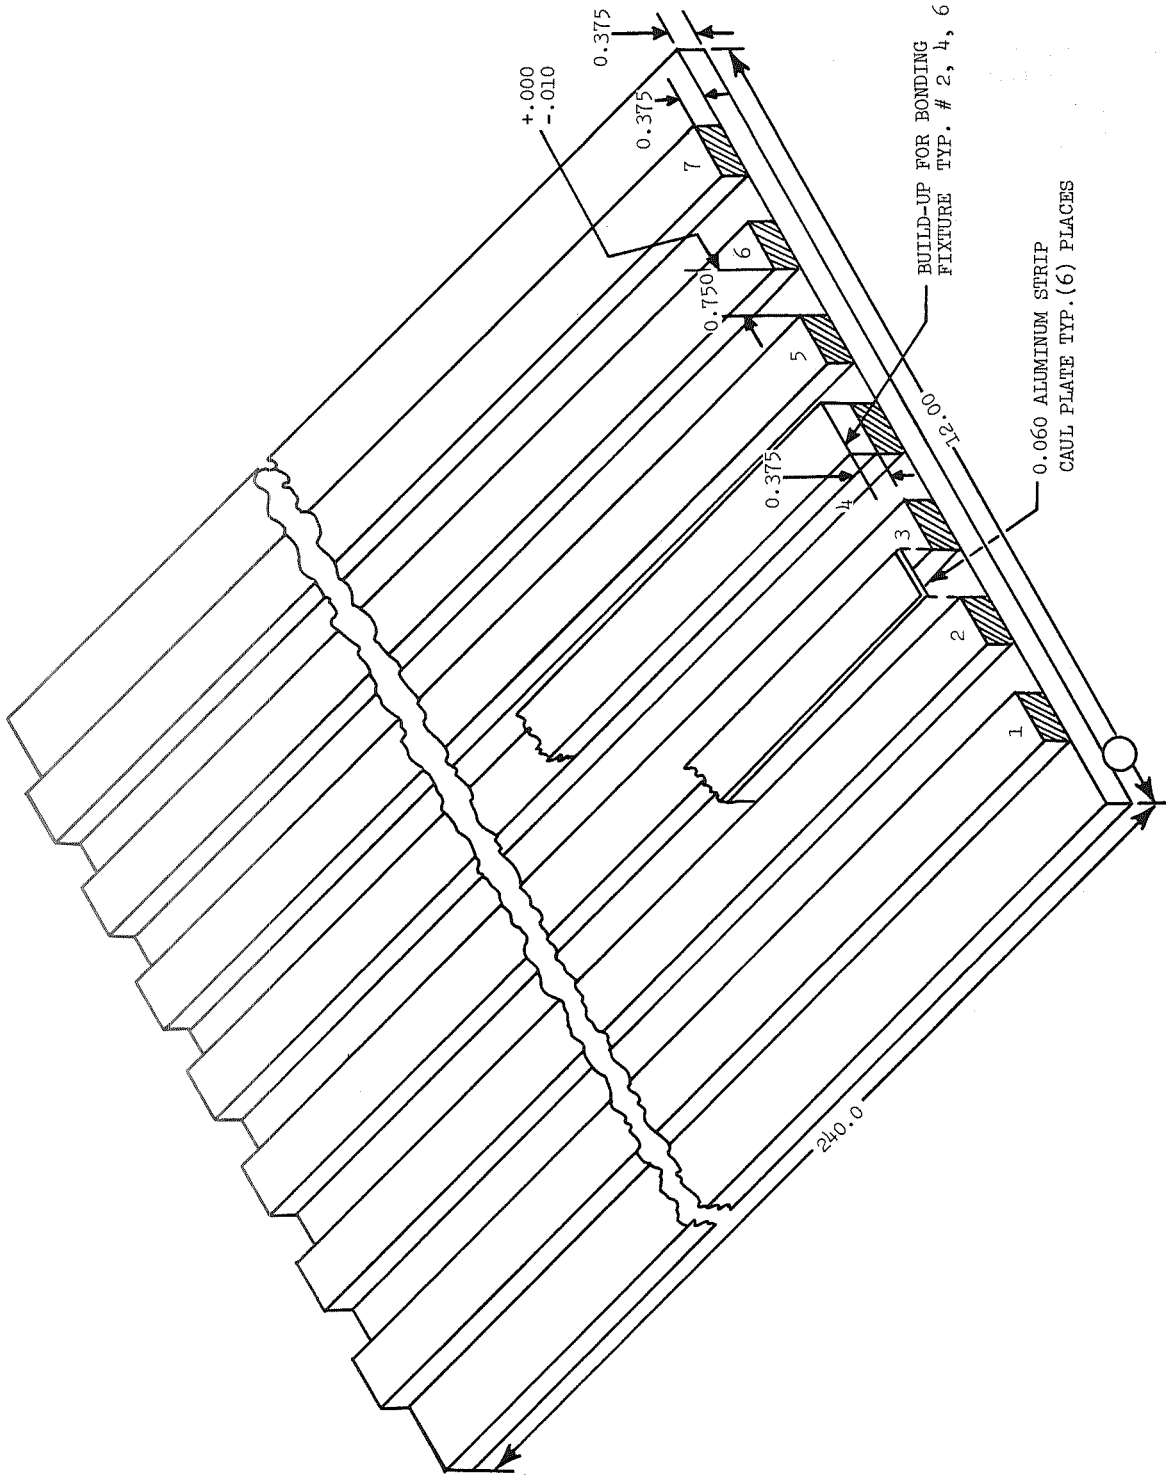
LAMINATING/BONDING FIXTURE CONVERSION.
